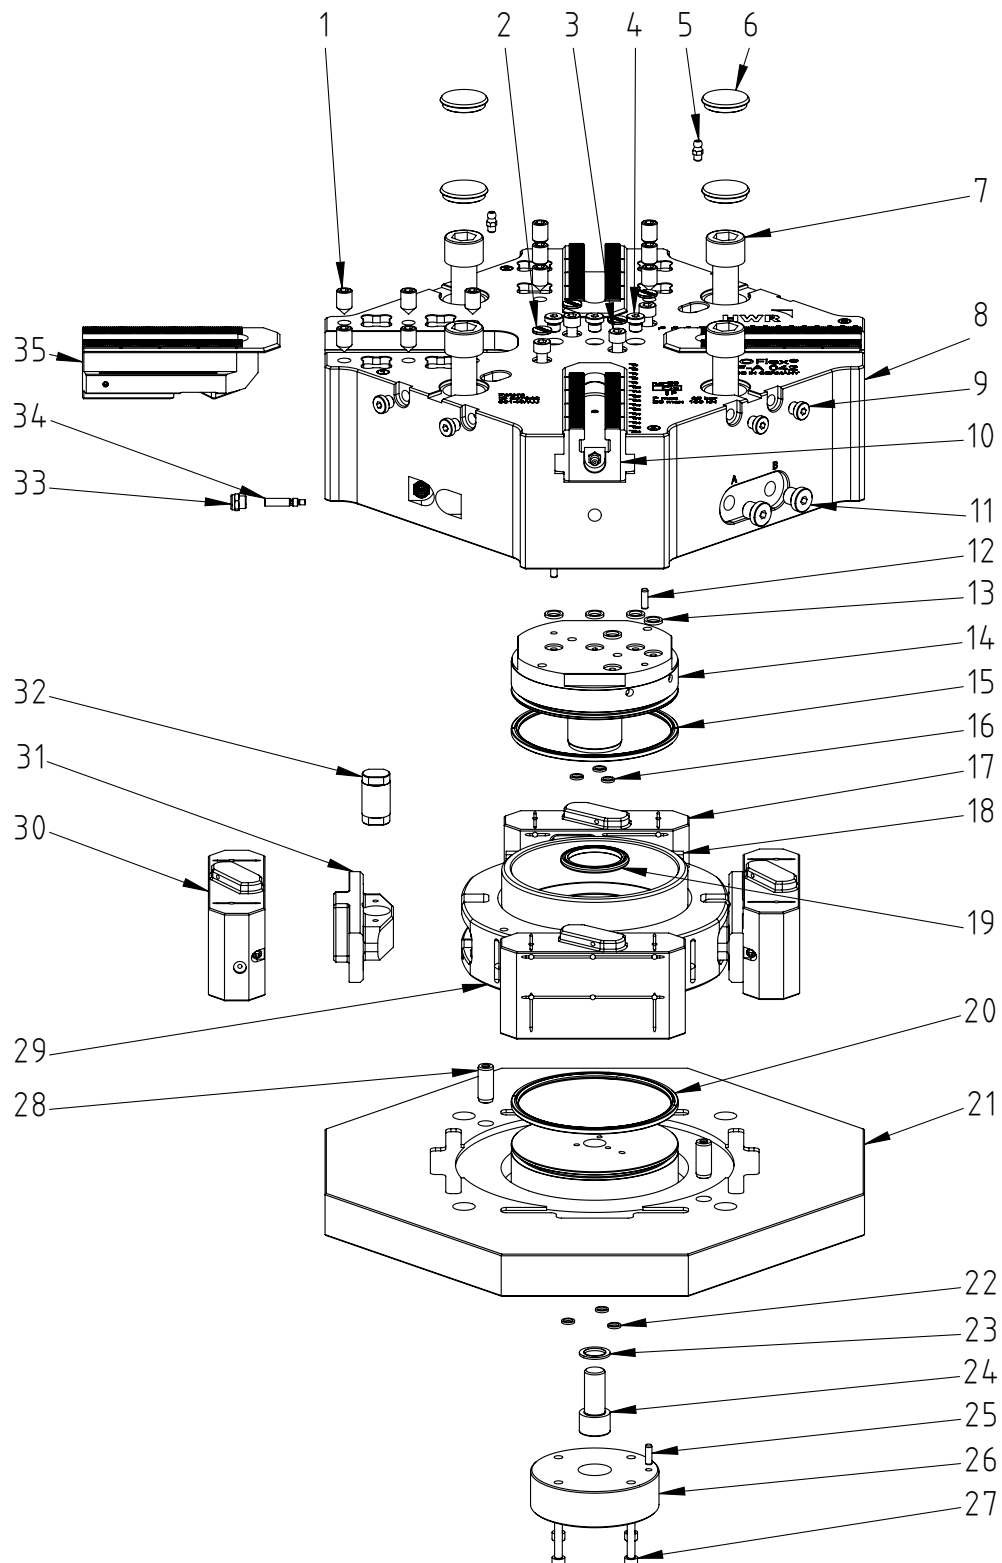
Spare parts VF-A 042 & VF-A 070
